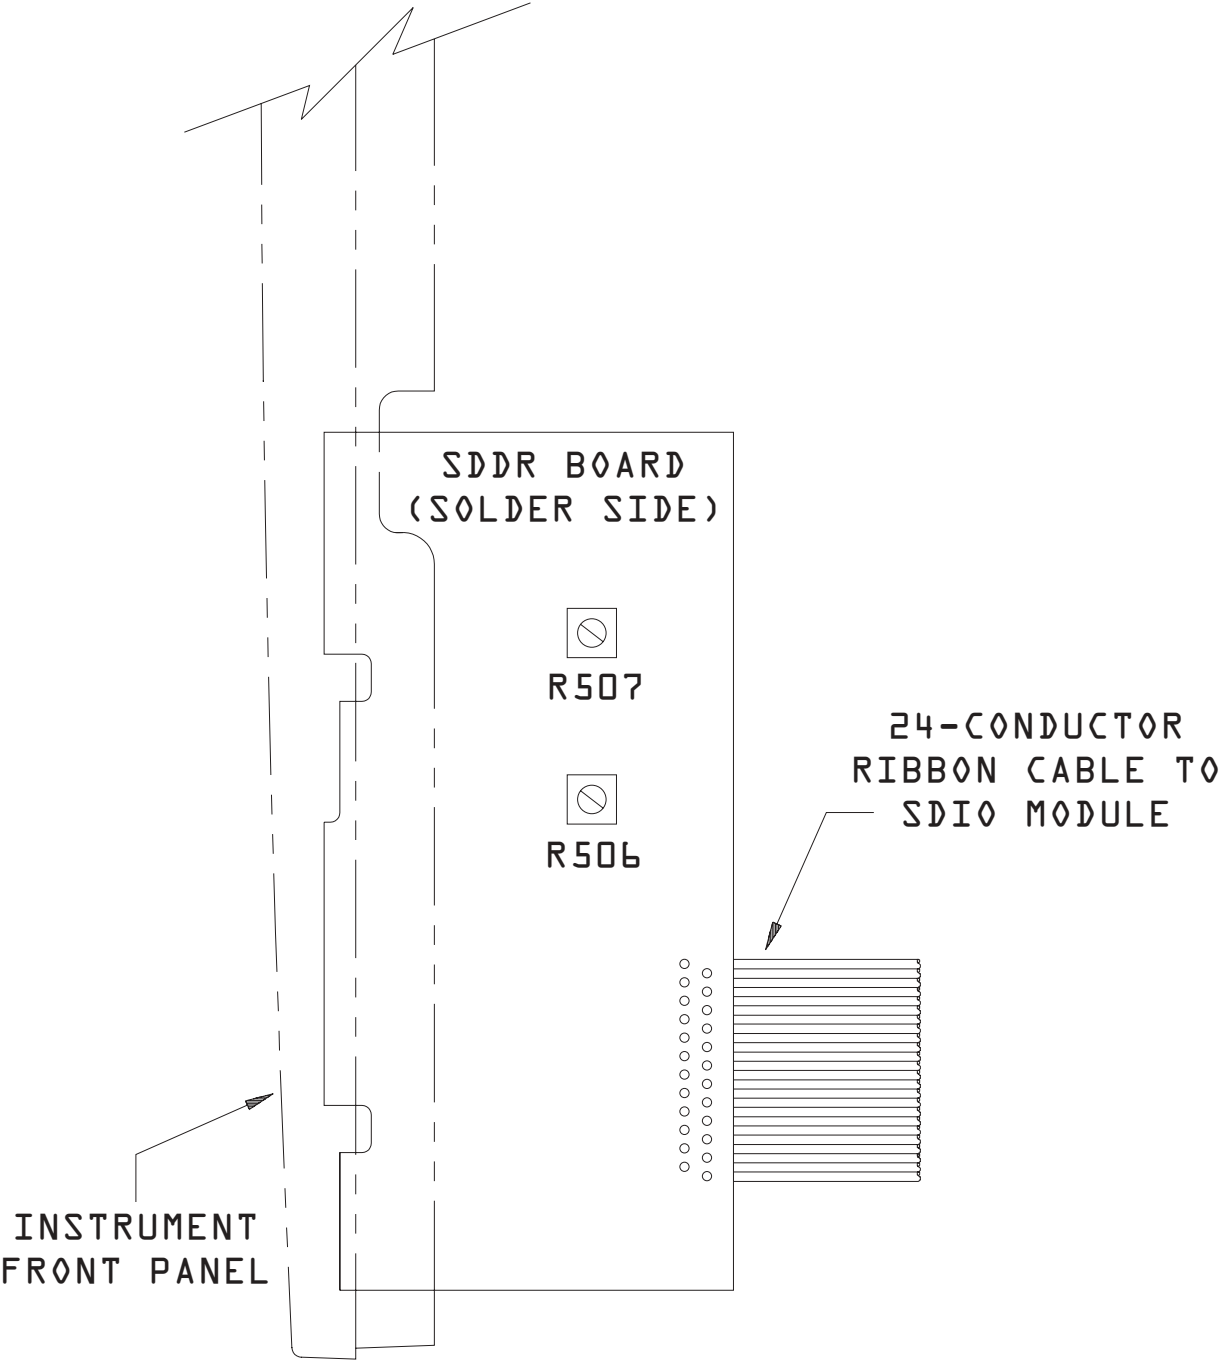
2700 Series DDF module adjustment locations (on solder side of board).
